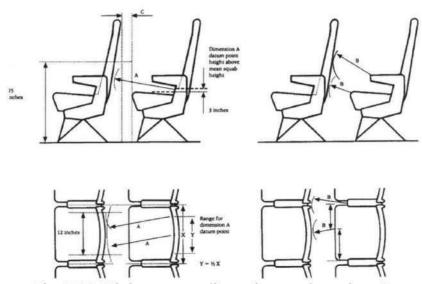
Minimum seat dimensions and spacings Passenger Seats
